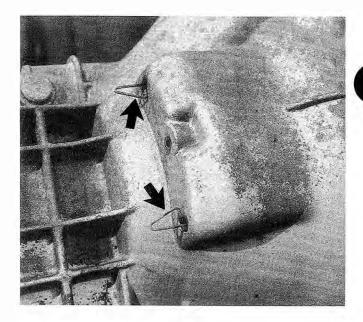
Release lever retaining spring tabs (arrows). Squeeze tabs to remove spring
